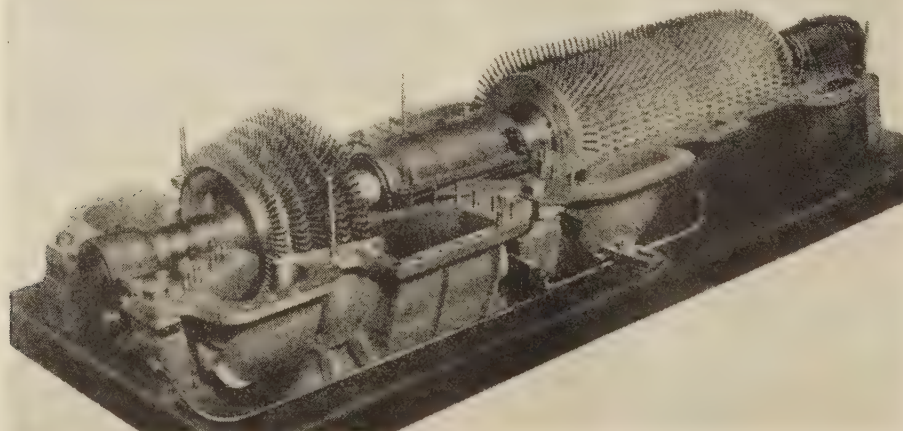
GAS-TURBINE UNIT WITH TOP REMOVED, SHOWING AN AXIAL-FLOW TURBINE DRIVING AN AXIAL-FLOW COMPRESSOR (Brown Boveri & Co., Ltd., Switzerland, and Allis-Chalmers Manufacturing Co., Milwaukee, Wis.)
